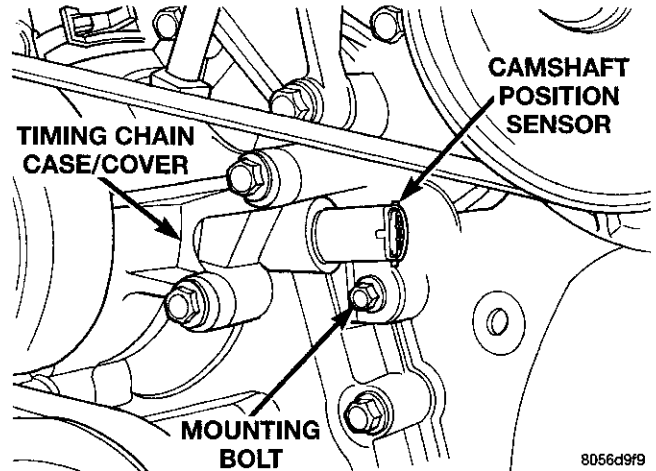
Camshaft Position Sensor Location—8.0L V-10 Engine
